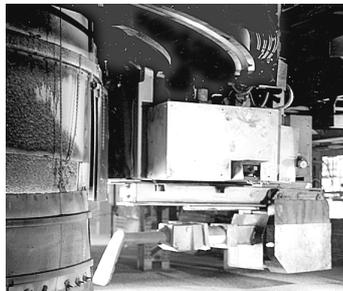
Rail-mounted automatic charging and stoking machines type SKS
